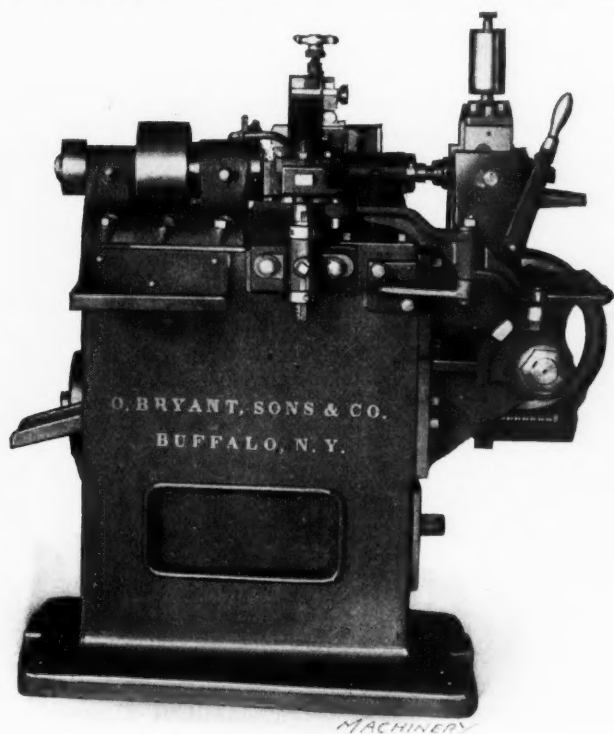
Front View of Bryant Radiator Nipple Turning Machine.
